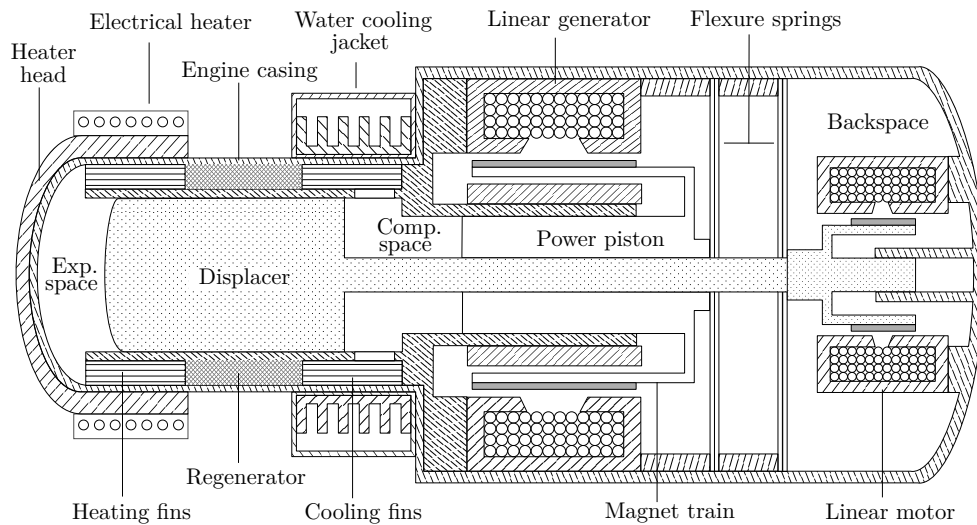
Cross-sectional drawing of the free-piston Stirling engine prototype
